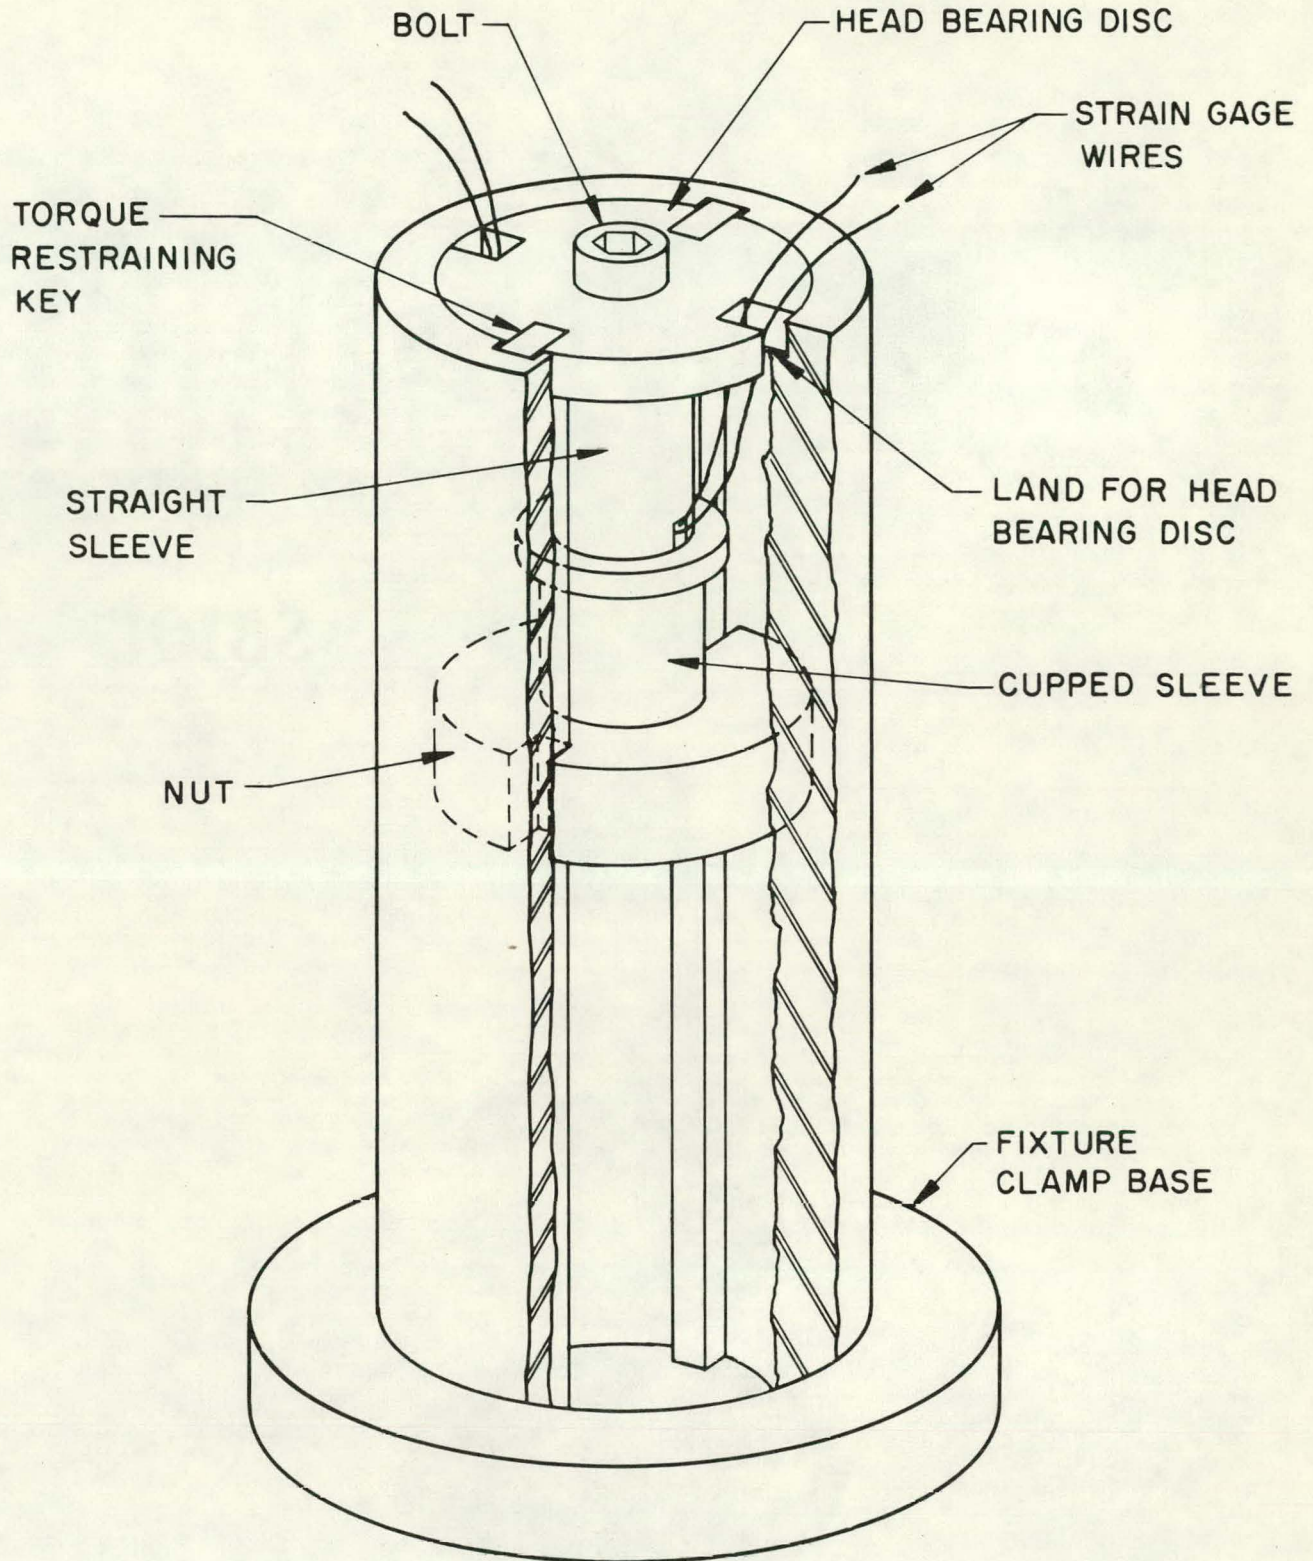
Universal Tightening Fixture with Typical Joint Test Assembly, SCC Test Joints
